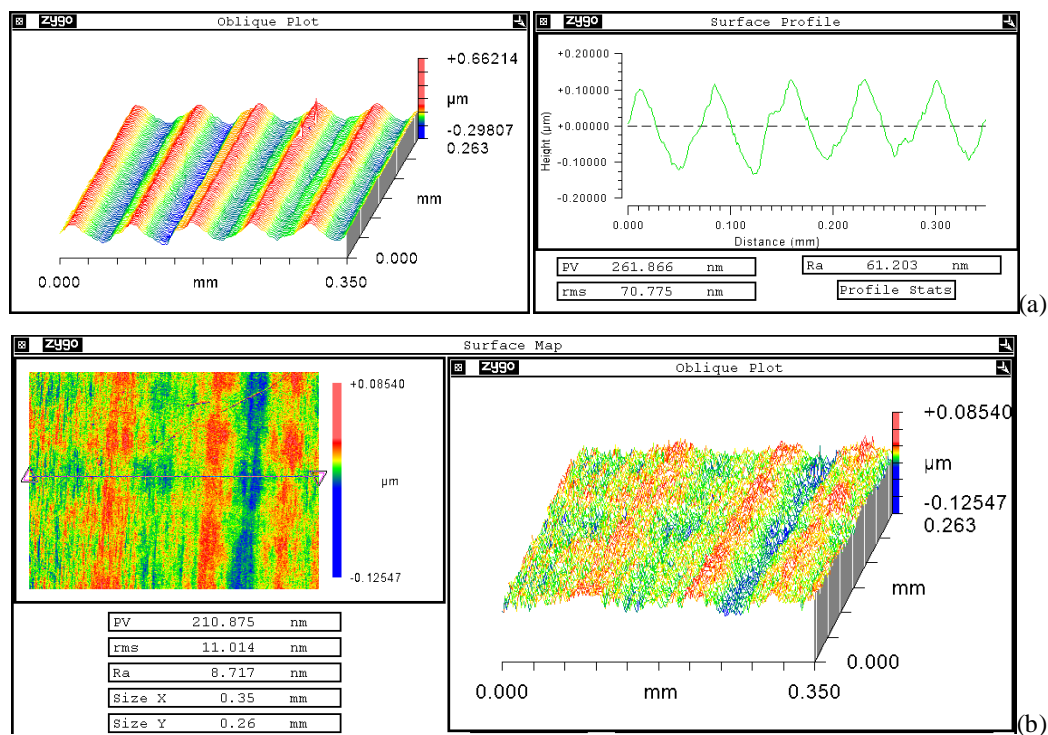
Machined surface with (a) regular pattern (climb-milling) (b) nanometric roughness
